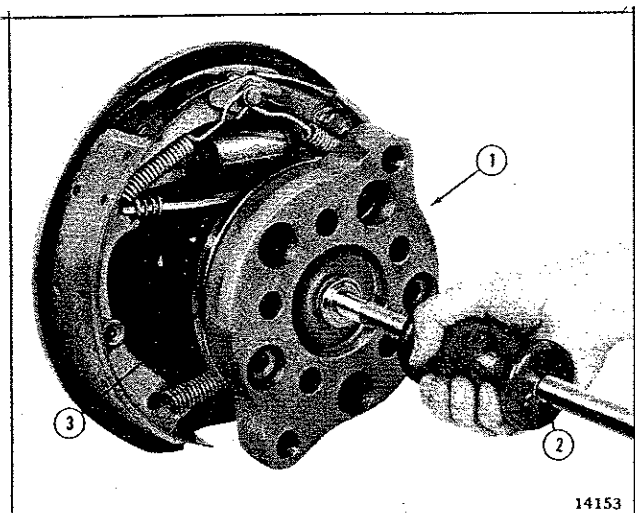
REMOVING FLANGED AXLE SHAFT
